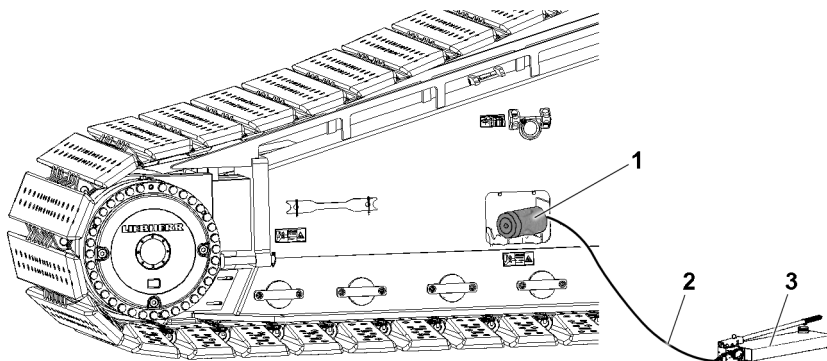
Tension cylinder, hydraulic connection with the hand lever pump
